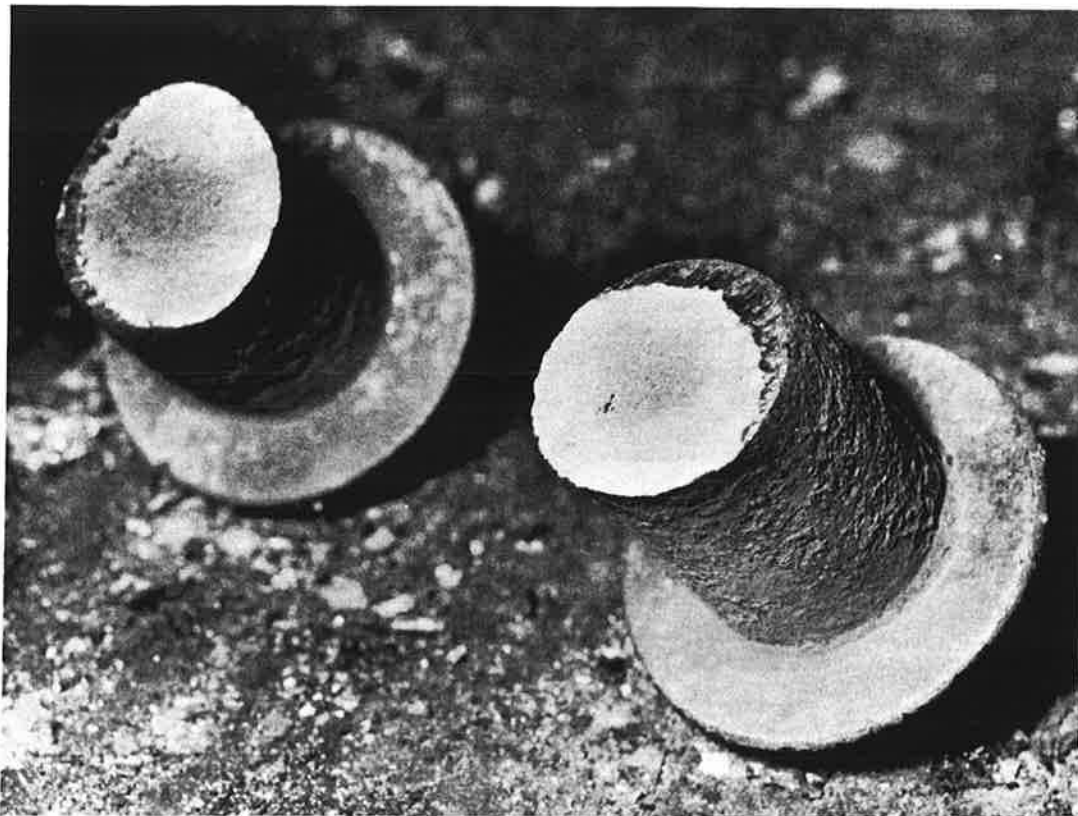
SHEARED DRAFT GEAR ASSEMBLY RIVETS
